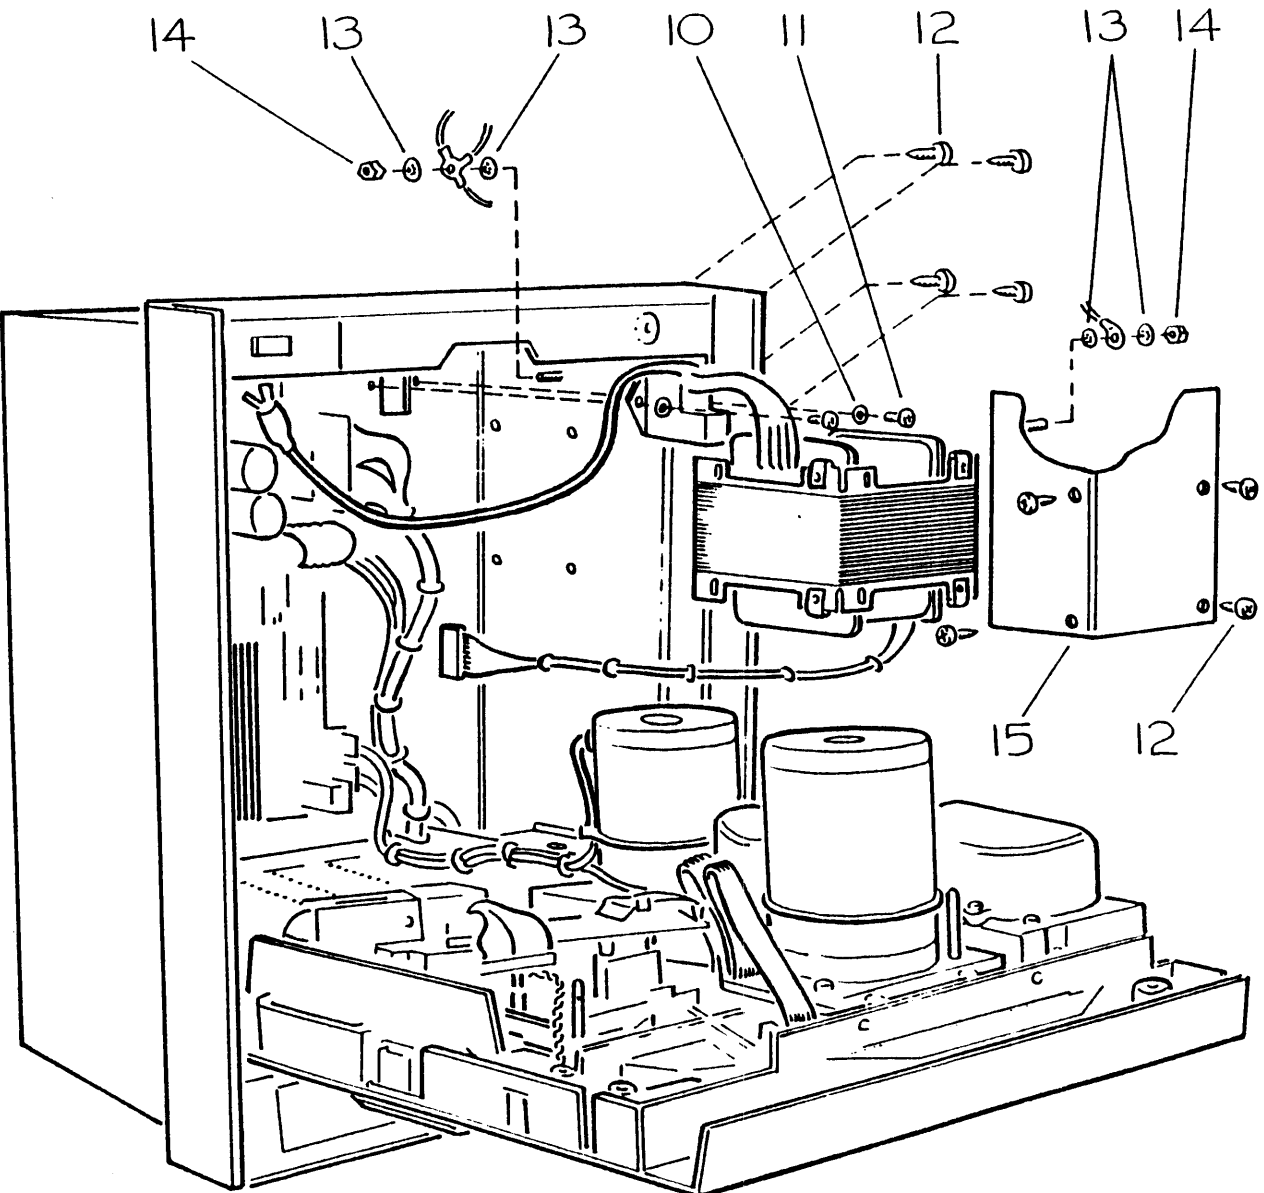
MAINS TRANSFORMER ASSEMBLY
